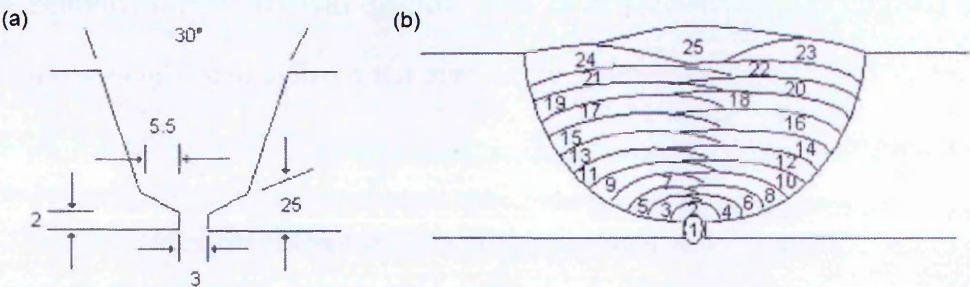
(a) Weld groove preparation (b) Schematic showing weld pass sequence in the Esshete 1250 pipe.
